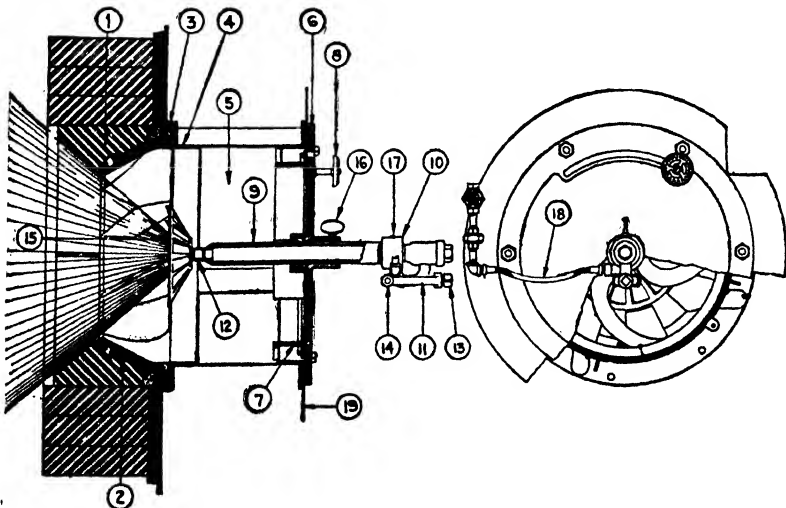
A mechanical atomizing burner. (Courtesy of Babcock and Wilcox Company.)
